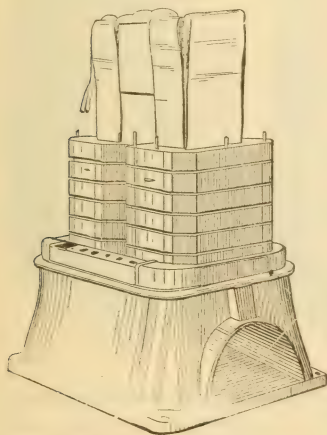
CONSTRUCTION OF A CORE TRANSFORMER.
